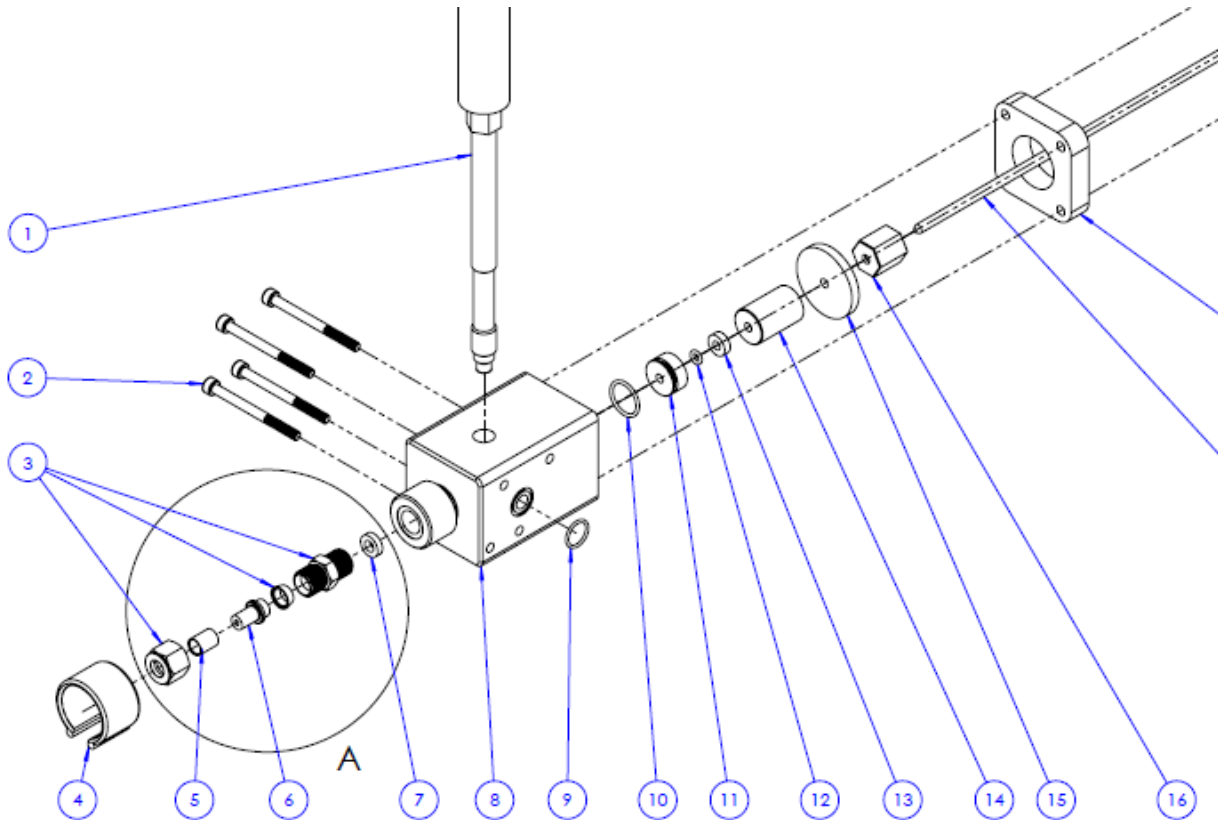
Screenshot of exploded nozzle assembly drawing. The Teflon Sleeve is shown as item #14.
